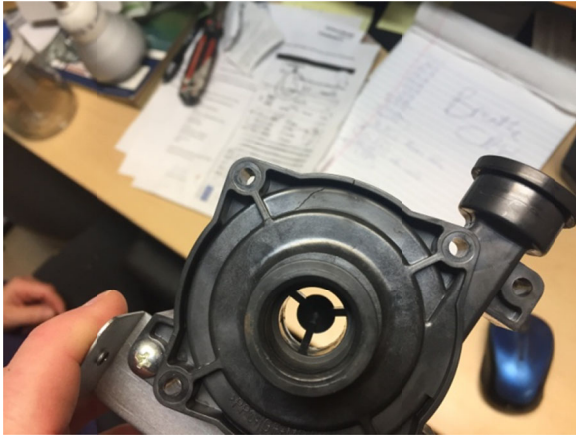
ASHP disassembly after cracked ASHP pump casing leaked glycol
